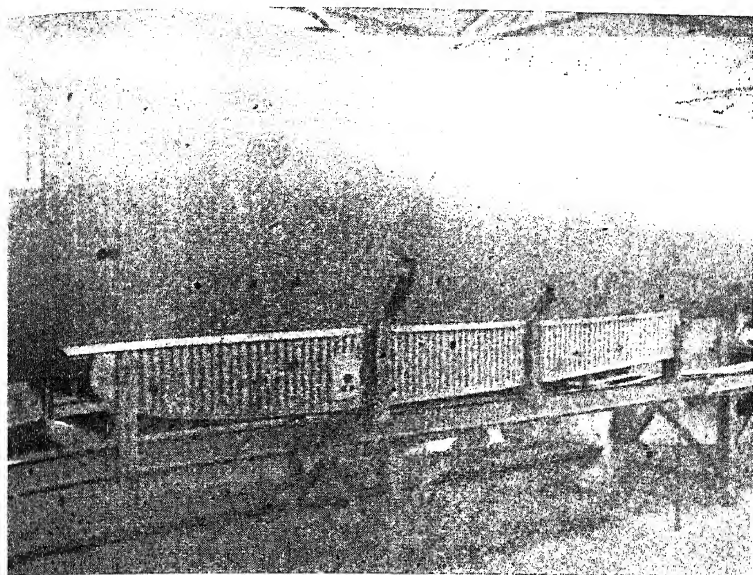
VULTEE "V-11" WING JOINT ON FUSELAGE
